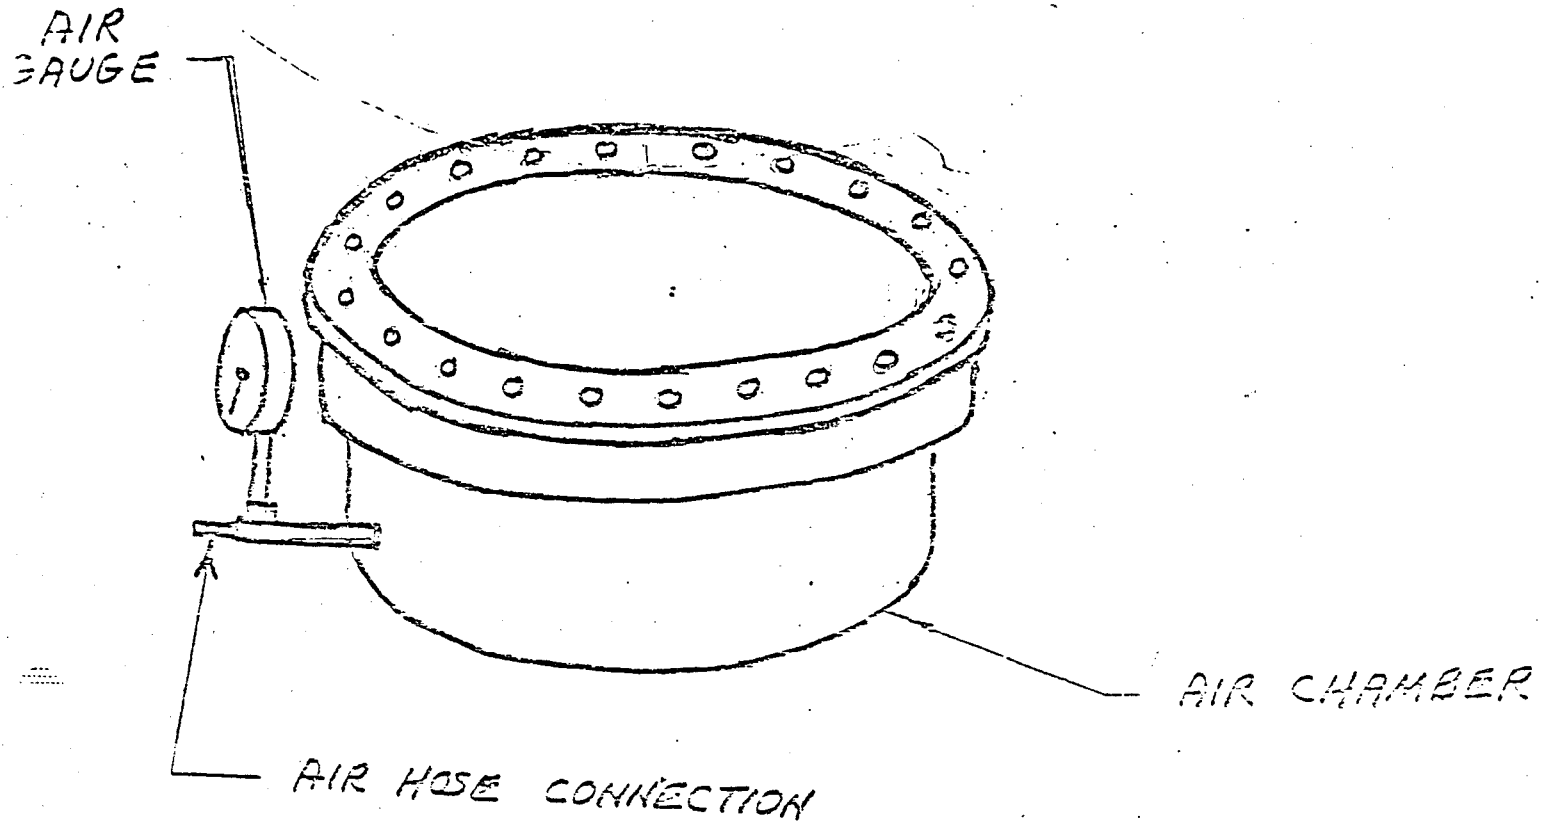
"Sketch of Pressure Test Fixture for Ice Condenser Seals"
